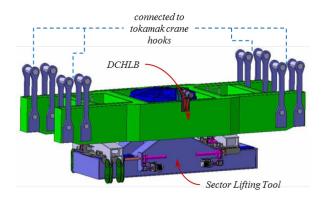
Configuration of the sector lifting tool and DCHLB connected to the Tokamak 4 crane hooks.
